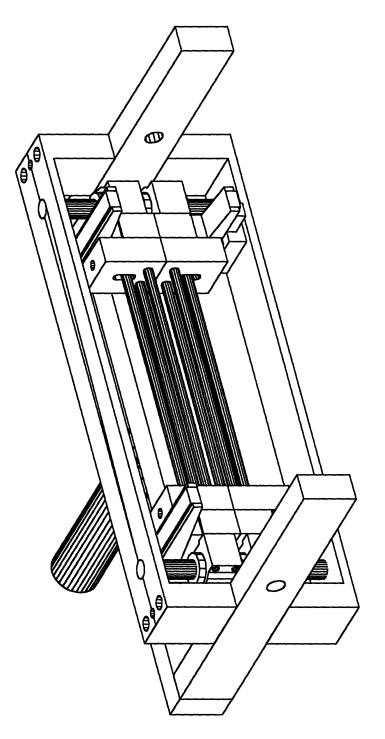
Gripper mounting assembly, clamping mechanism, and main frame.
